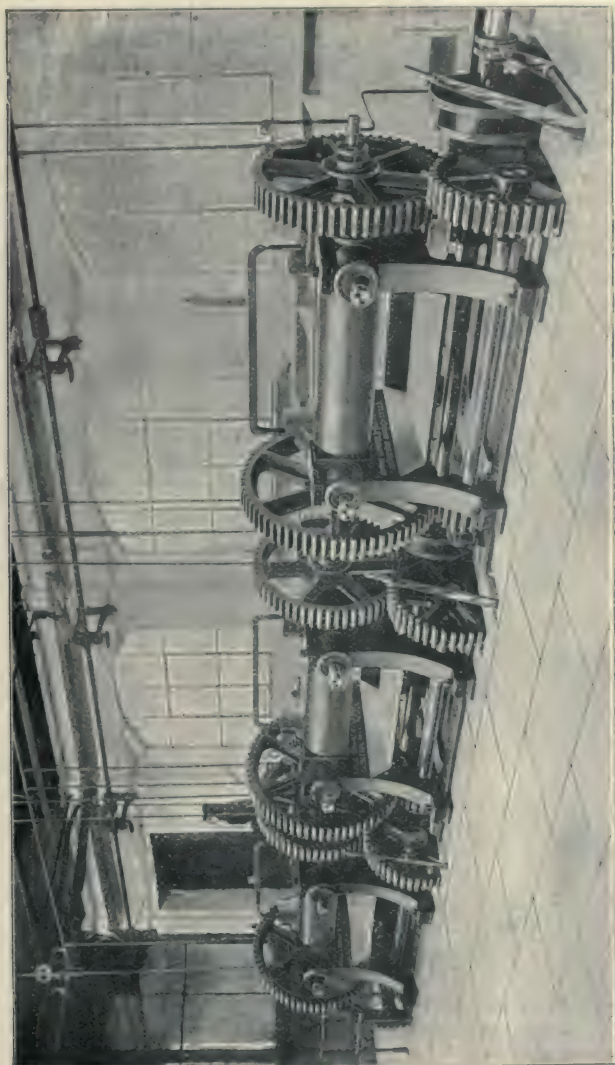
Improved mixing machine driven by electric motor and fitted with patent friction clutch (the rollers are hollow for steam heating and water cooling).
